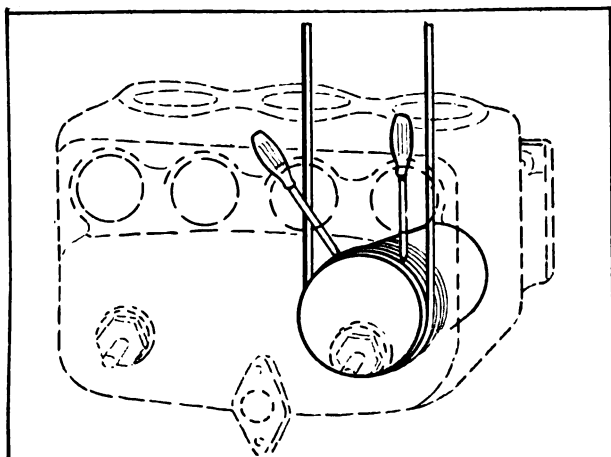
Utilizing Thin Metal Band to Compress Ring When Piston Head Slipped into Combustion Chamber, Preventing Removal from Cylinder.
